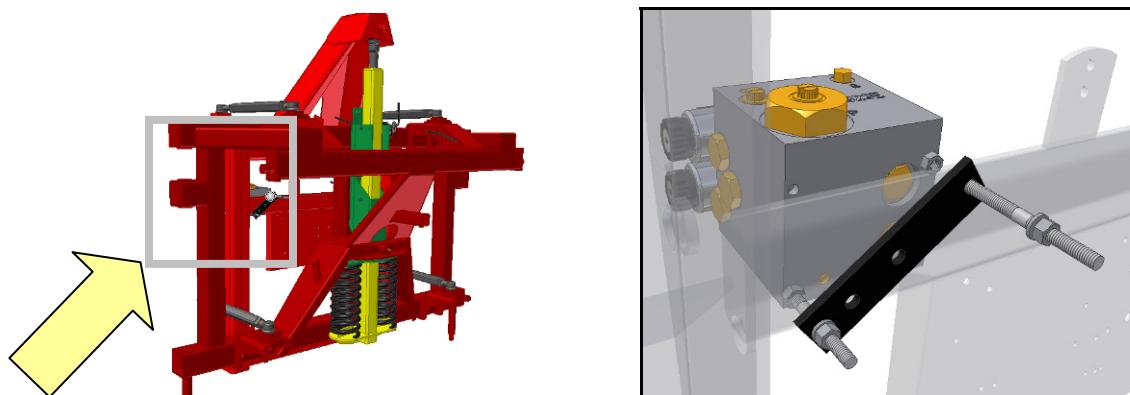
Mounting Valve Block with Mounting Bracket and Hardware
